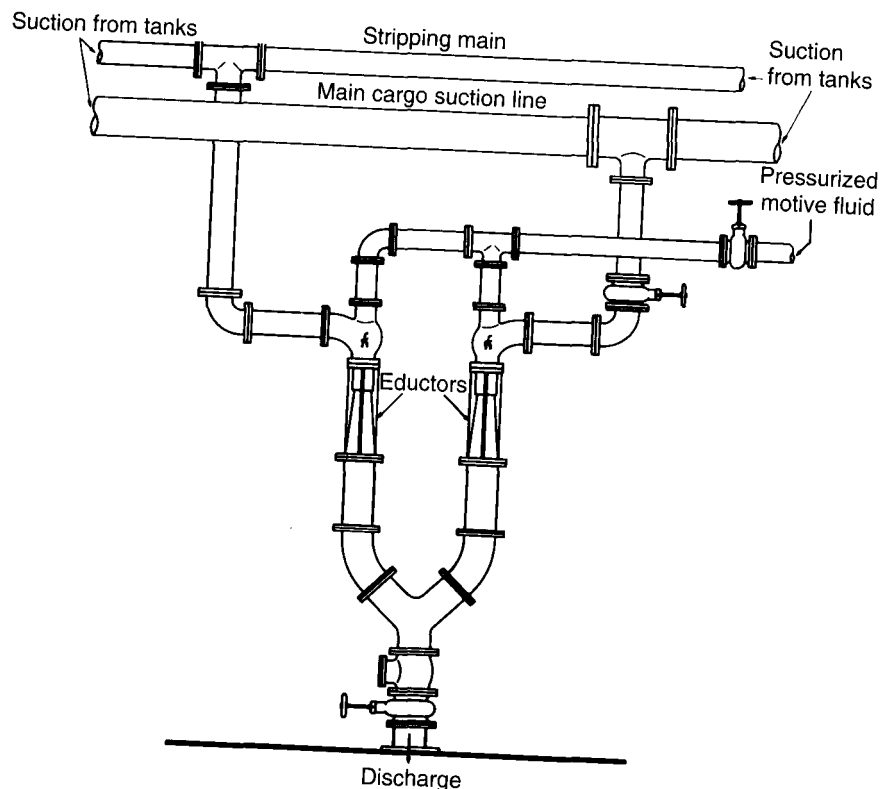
Stripping eductor. Courtesy Schutte-Koerting.
